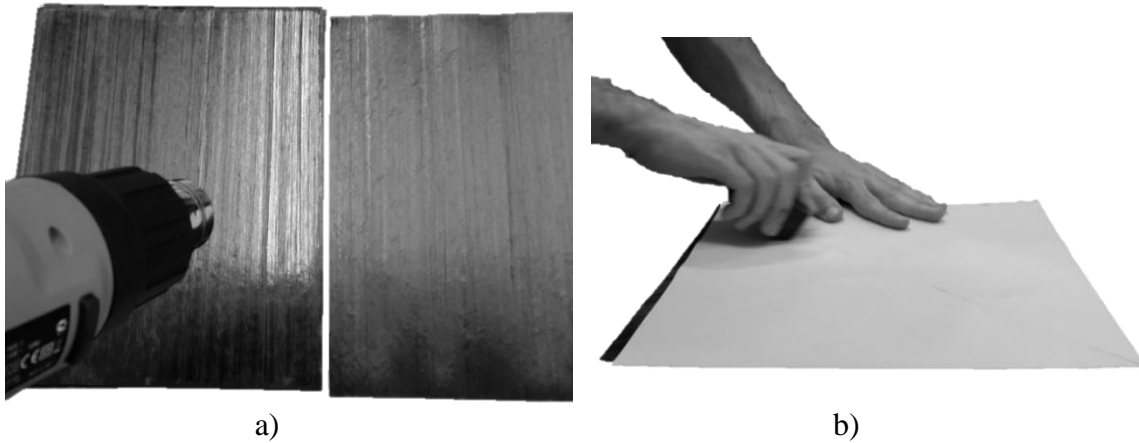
Laminate manufacture, heating of the layers (a), applying pressure on the surface (b)
